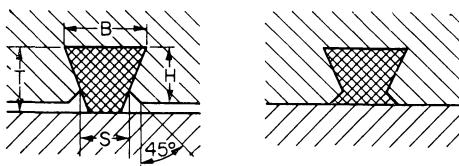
Seal with trapezium cross section gasket in dovetail cross section groove
